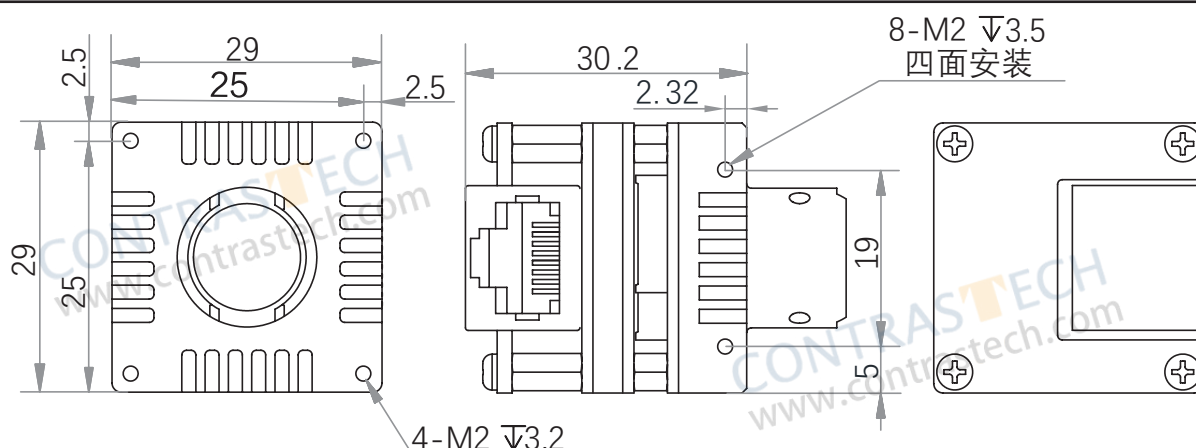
Mechanical Dimensions (in mm) of the M12-mount RJ45 interface Cameras with 29 * 29 * 30.2 mm.
